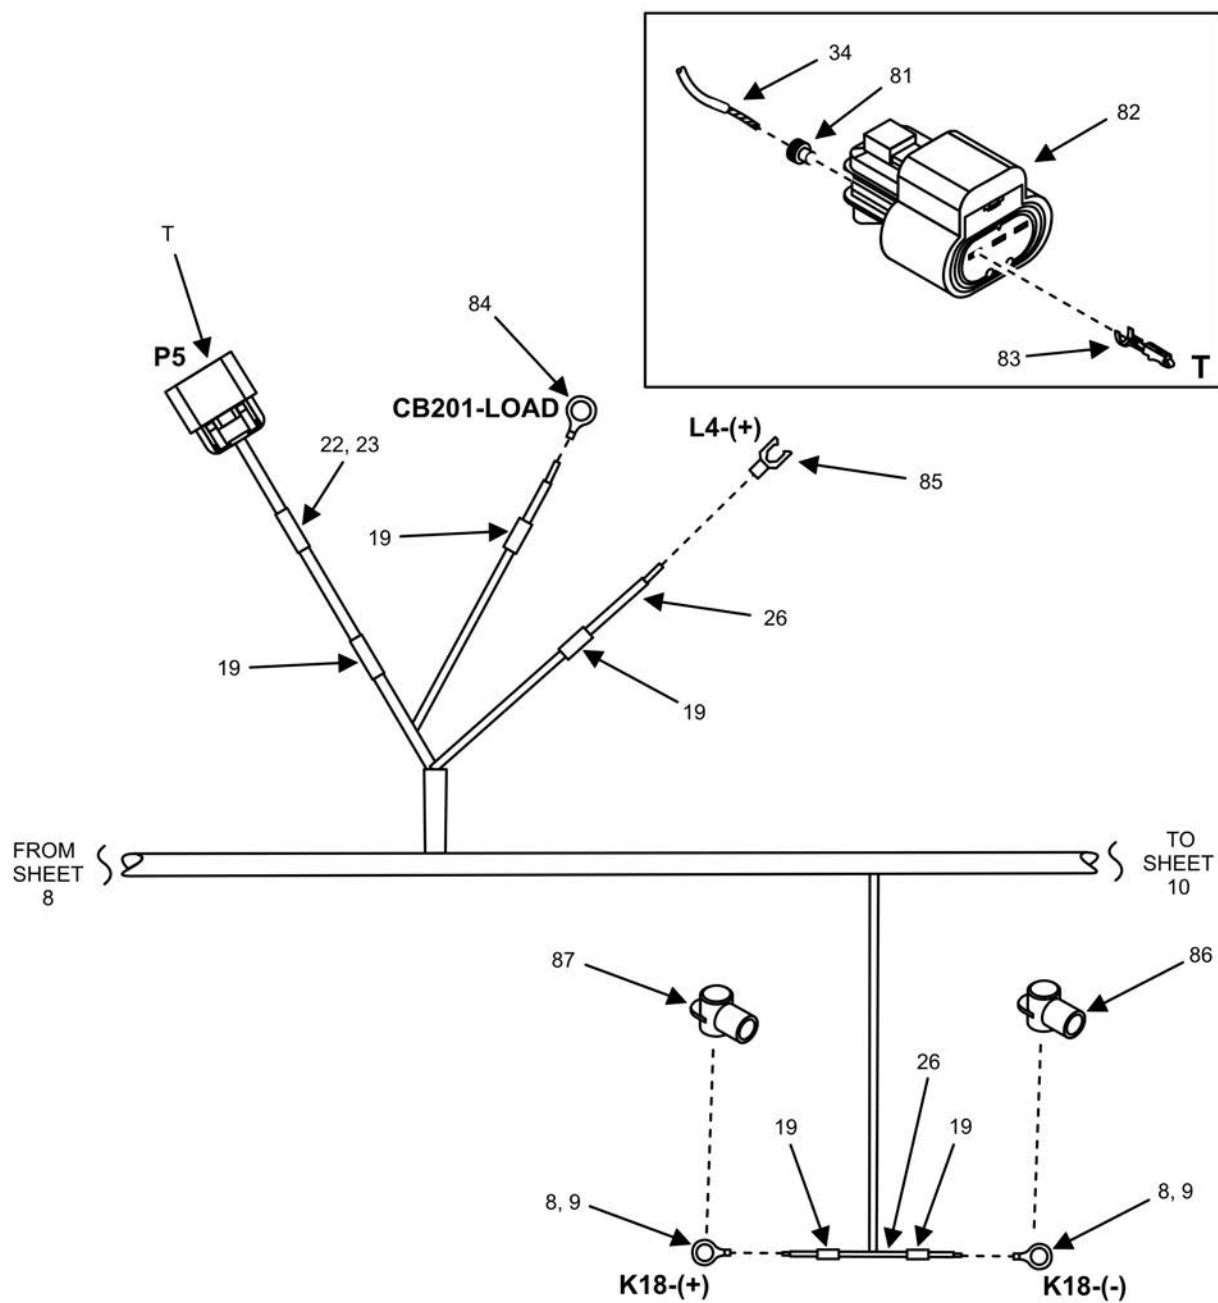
Engine Wiring Harness (Sheet 9 of 19).
